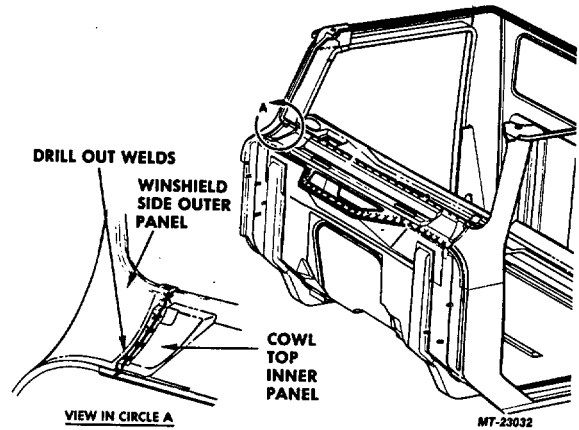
Windshield Outer Panel to Cowl Inner Panel Spot Welds (Rt. Side Shown)
